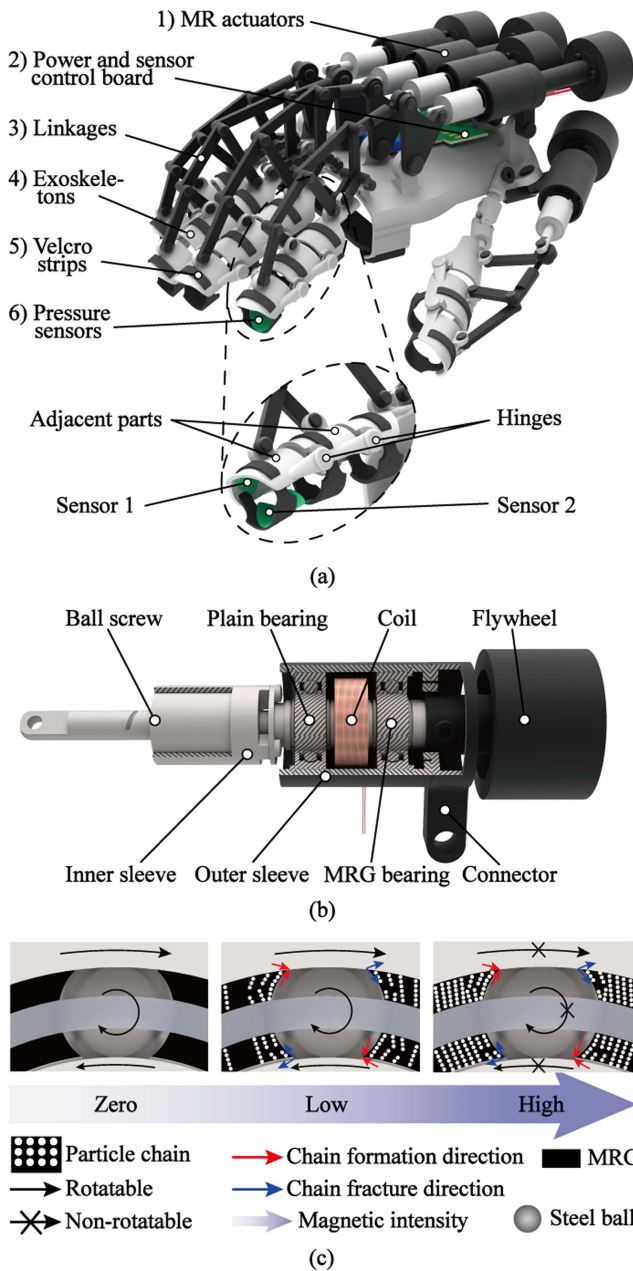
Mechanical design. (a) Three-dimensional model of the hand exoskeleton prototype. The hand exoskeleton consists of six parts: 1) MR actuators; 2) power and sensor control board; 3) linkages; 4) exoskeletons; 5) Velcro strips; 6) pressure sensors. (b) Cross-sectional view of the MR actuator. (c) Three working states of the MRG bearing under different magnetic field intensities.
